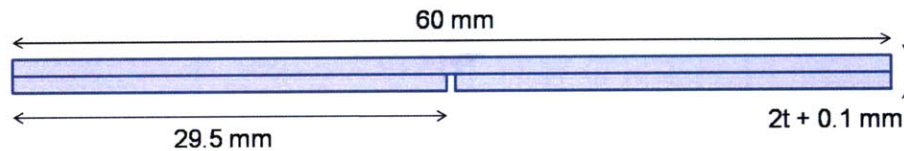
Geometry of four point bend experiment specimen; $t = 1.5$ mm and depth = 8 mm
